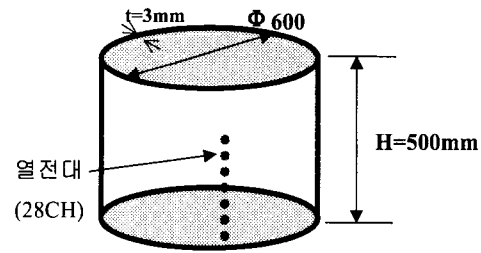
Dimensions of test cylinder with thermocouples (28 Channels) attached along the axial direction
